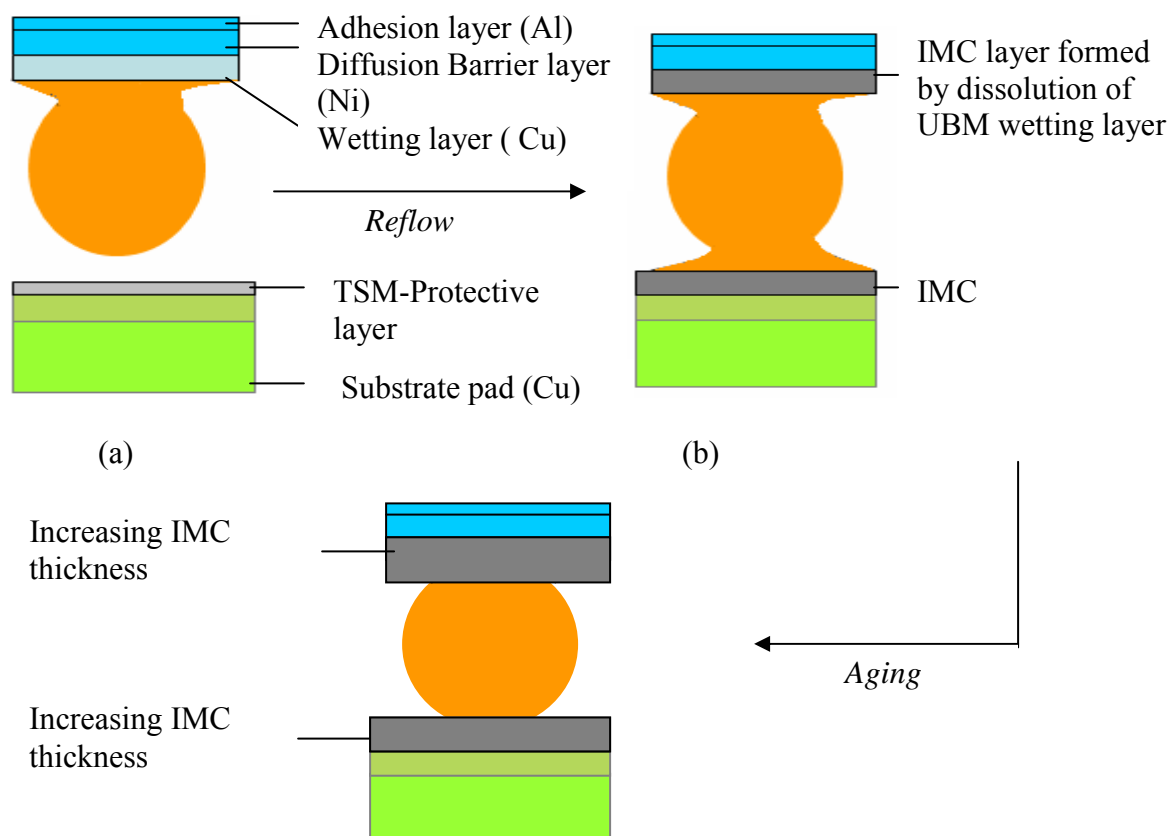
IMC formation in assembly of flip-chip. (a) Unassembled UBM and TSM (b) Reflowed assembled chip (c) Aged assembled chip
